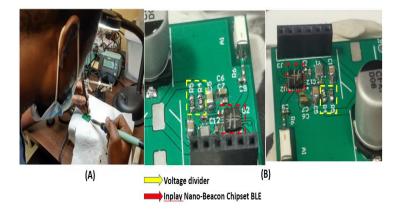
a) Soldering of fabricated board: (b) Output product after soldering
